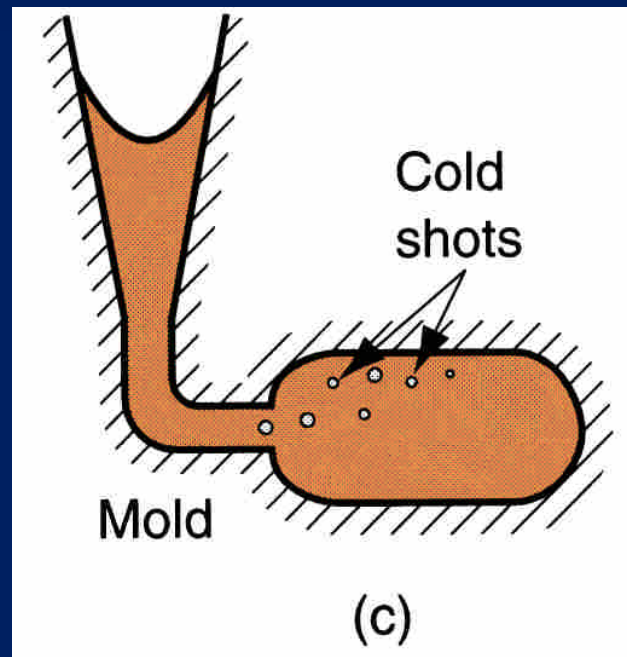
Some common defects in castings: (c) cold shot
